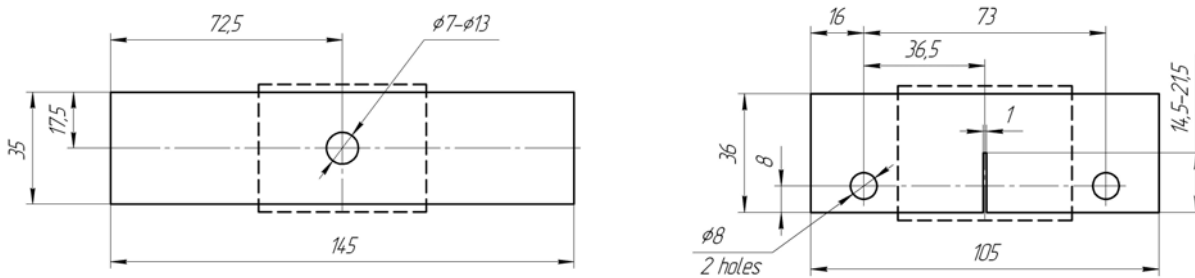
Scheme of the specimens, thickness 4 mm: a) specimen with central hole; b) specimen with edge crack.
